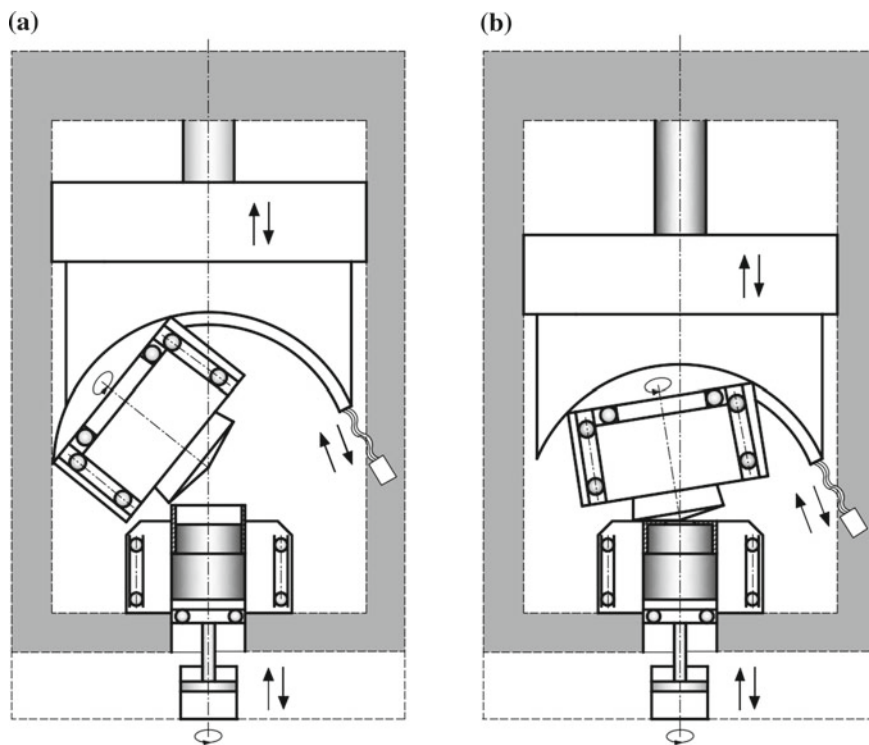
Kinematics scheme of rotary forging machine with variable angle of inclination of the forming roll: a The initial stage of rotary forging, b the final stage of rotary forging
